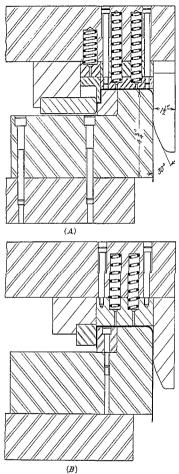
Sections through dies for forming the return flanges on the sides of the front-door panel. (Mills Industries, Inc.)
